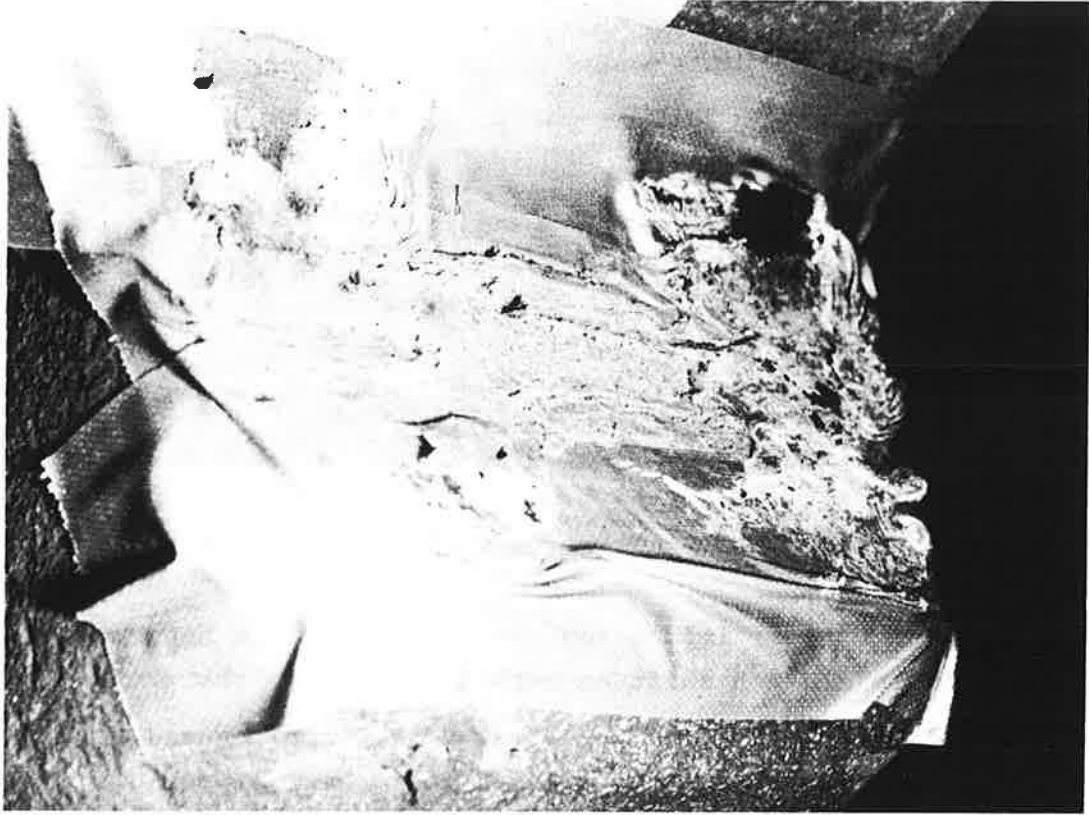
CRUSHED TAPE ON HOPPER REAR COUPLER HORN WHICH INDICATES CONTACT WITH BUFFER CASTING DURING IMPACT.
